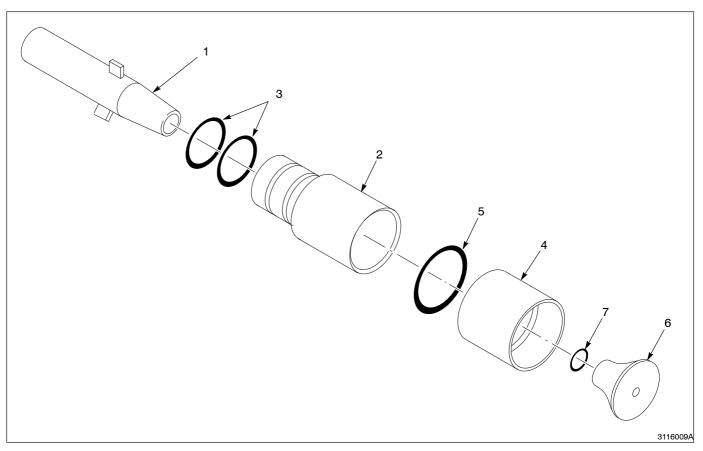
Old Style 32-mm Conical Nozzle Service Kit
